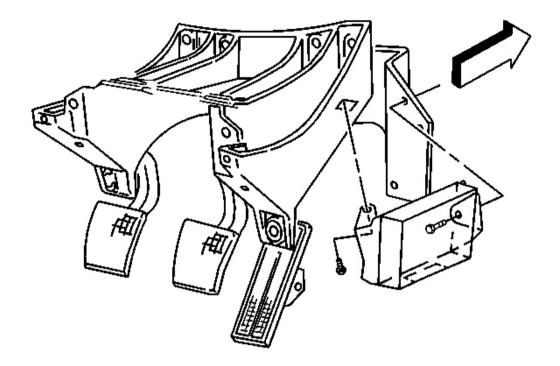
Signal Processing Module At Steering Column Bracket Courtesy of GENERAL MOTORS CORP.
